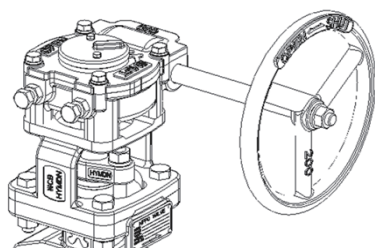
Handwheel Rotation Direction for CLOSED and OPEN position of a gear box
